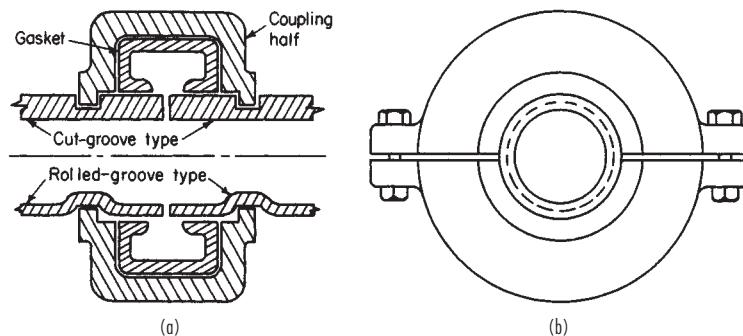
Grooved joint. (a) Section. (b) End view.
